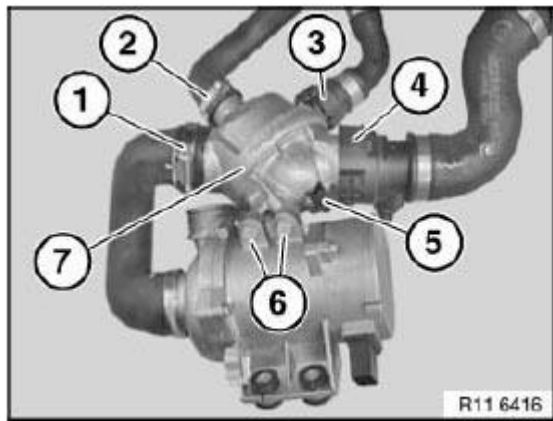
Identifying Hose Clip, Coolant Hose, Plug Connection And Screws
